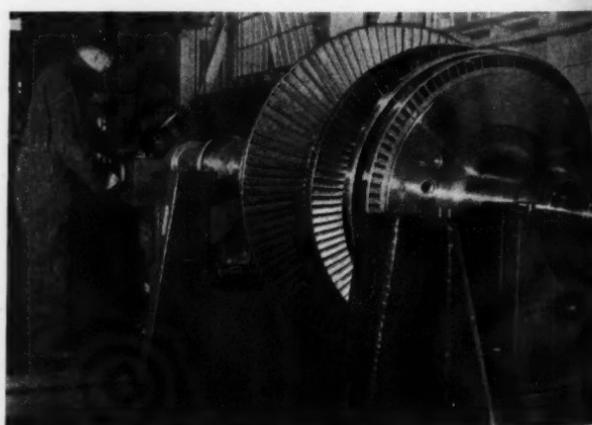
Testing a Spindle for an 8,500 H. P. Steam Turbine for Balance. This Machine Locates the Exact Point of Unbalance
